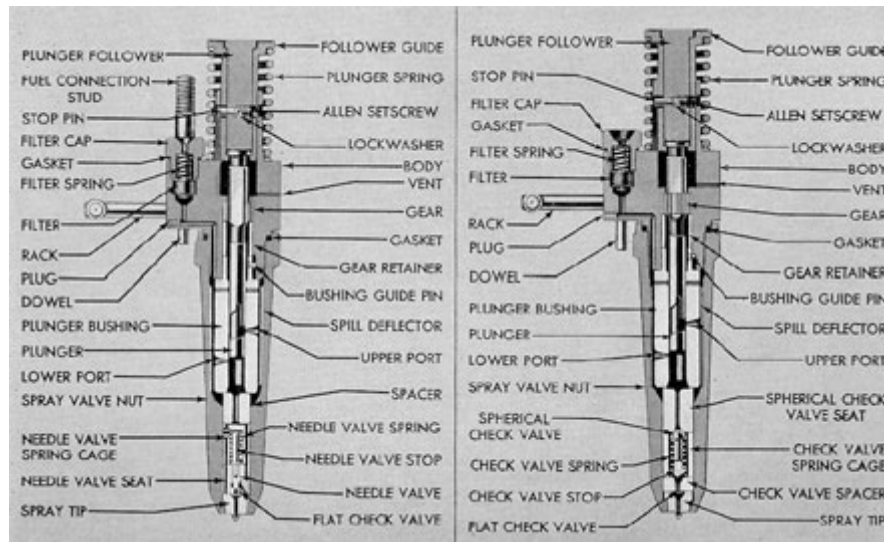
Cross sections of needle valve and spherical check valve type unit injectors, GM.
